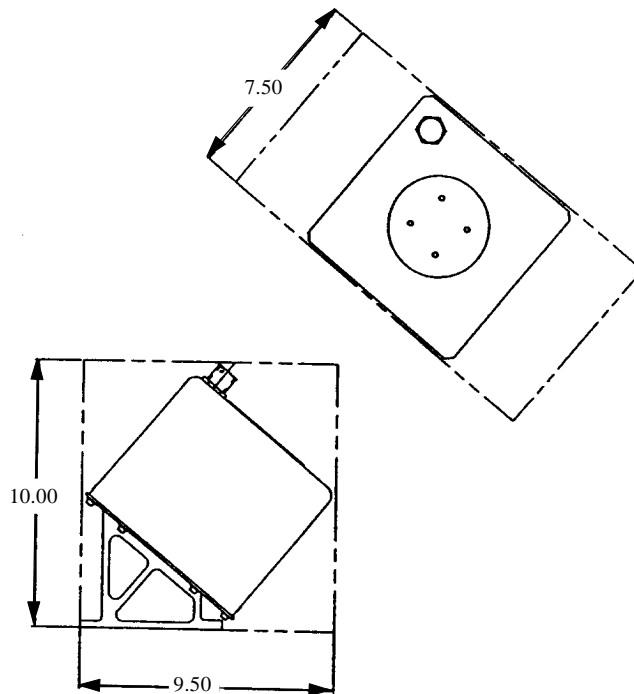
Third Stage Retro Motor Assembly (Single Motor)
